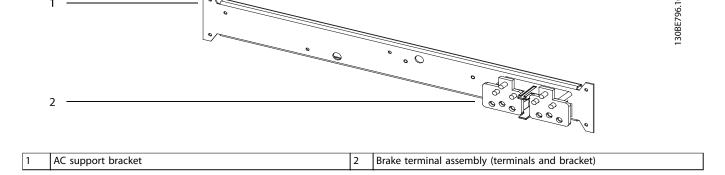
Assembling the AC Support Bracket with the Drive Module 2 Brake Terminal Assembly
